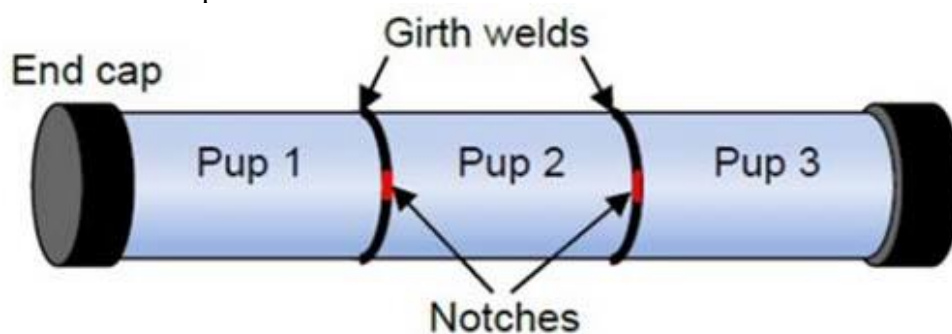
Full-Scale Test Specimen Schematic [69], [70]
